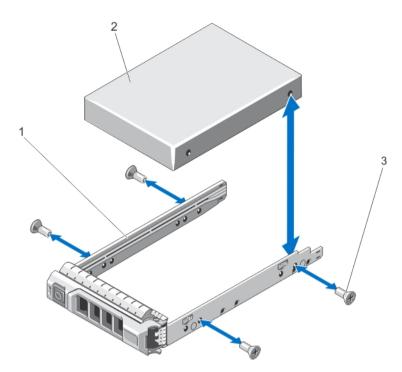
Removing and Installing a Hard Drive Into a Hard-Drive Carrier
